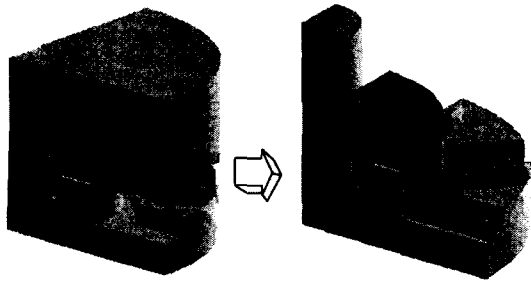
Forging Model I of a motor commutator for a fuel pump
